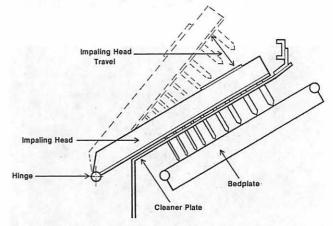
Section View of Impaling Head, Bedplate and Cleaner Plate.
